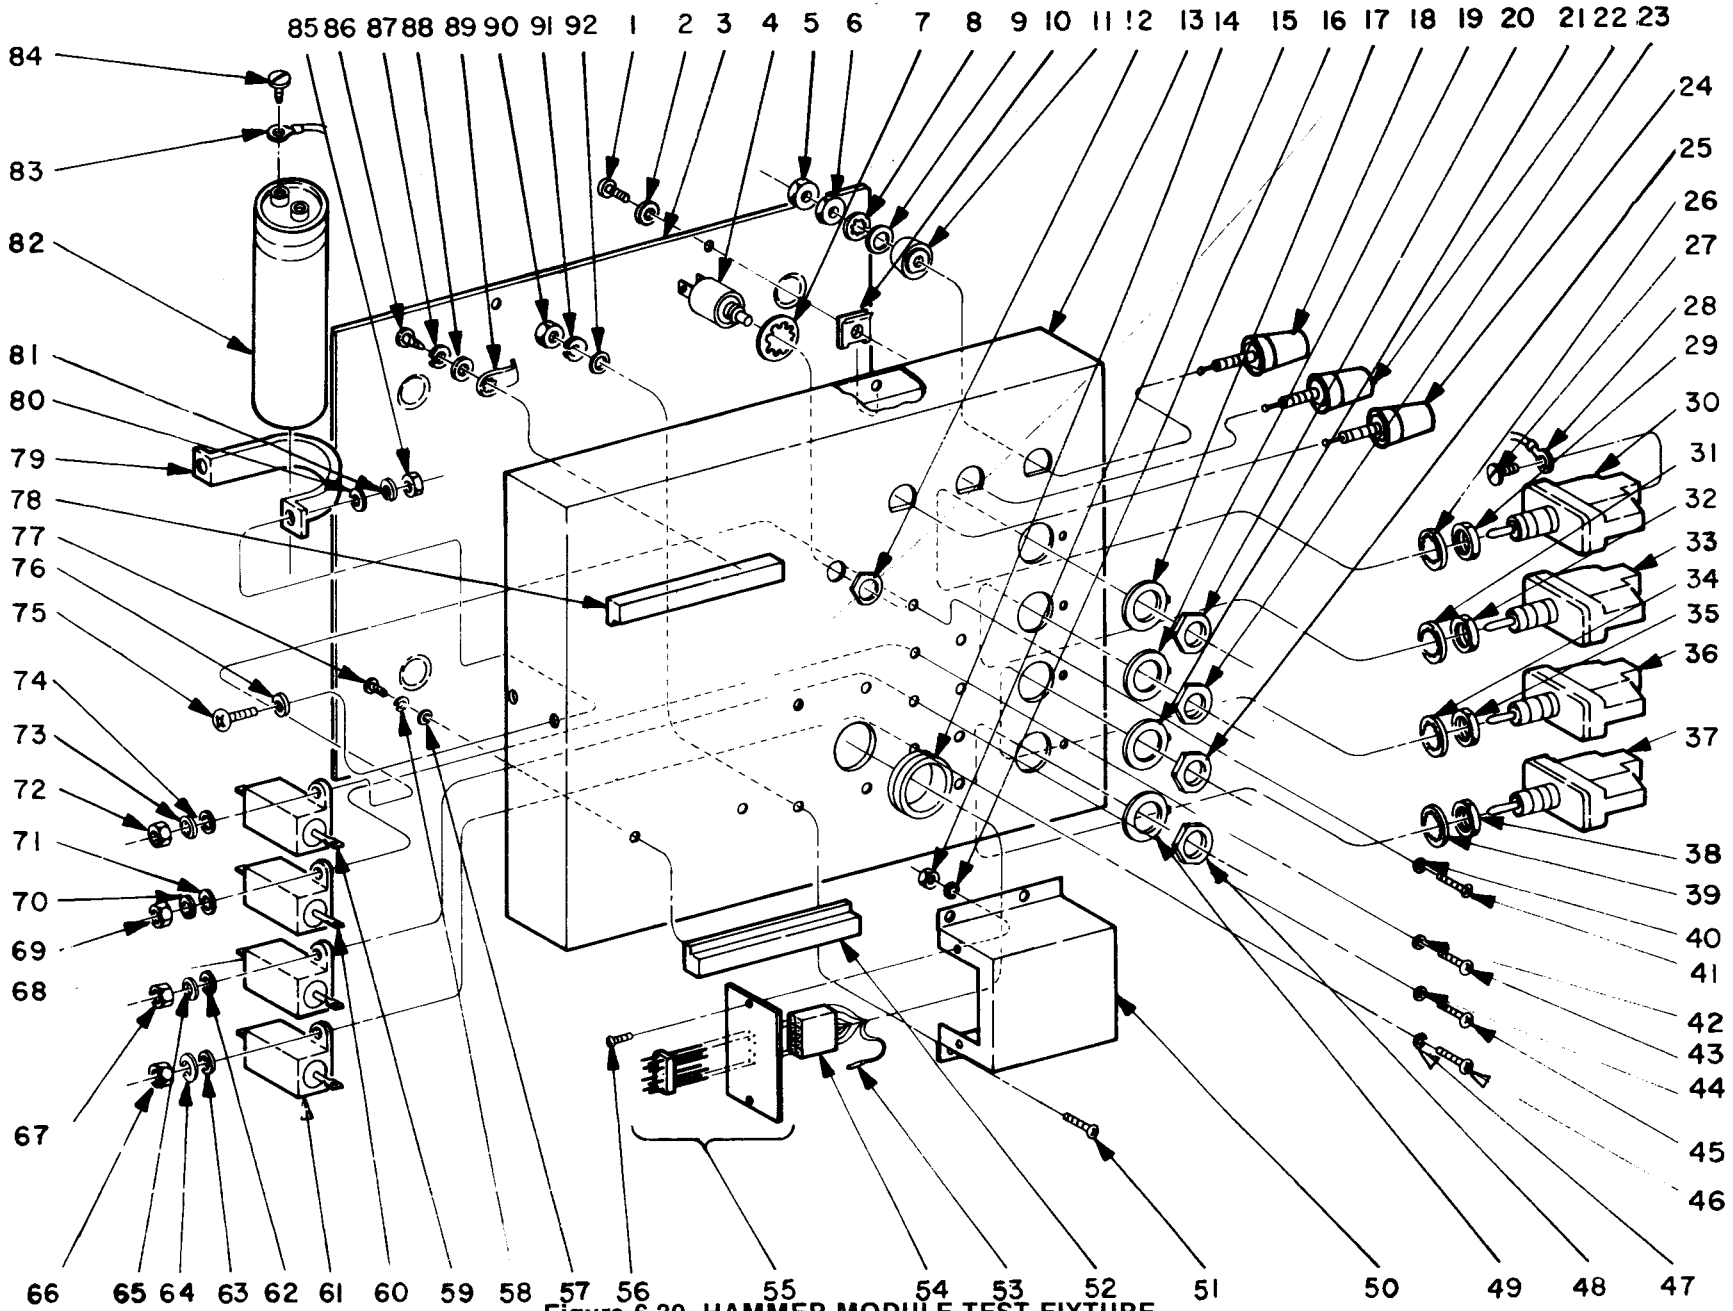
HAMMER MODULE TEST FIXTURE.
